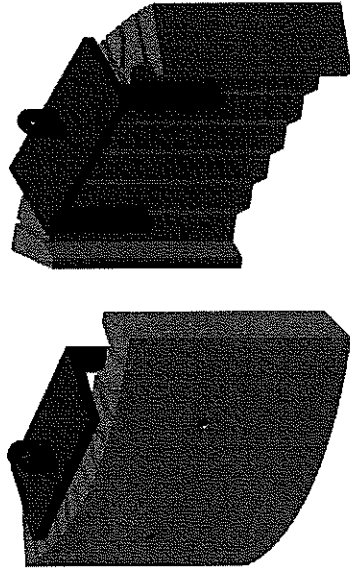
RENDER OF THE LIFTING JIG SUPPORTING A LOWER PLENUM REFLECTOR BLOCK FROM THE INNER SAWTOOTH FACE.
